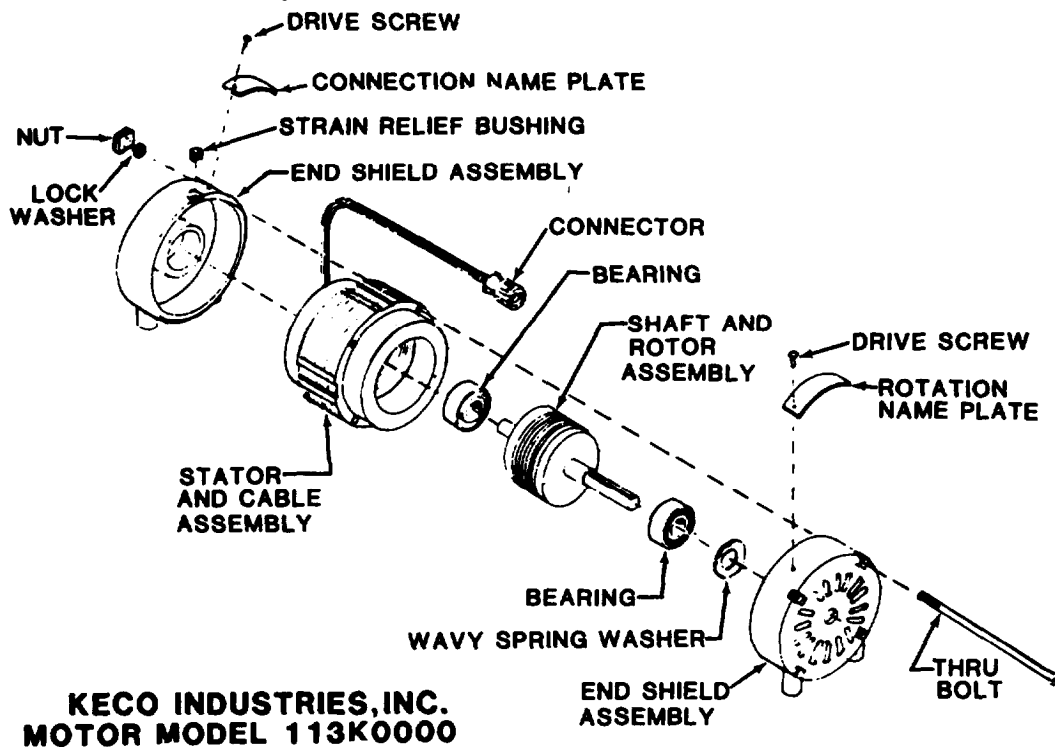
Motor Assembly, Keco Industries, Inc., Model 113K000
